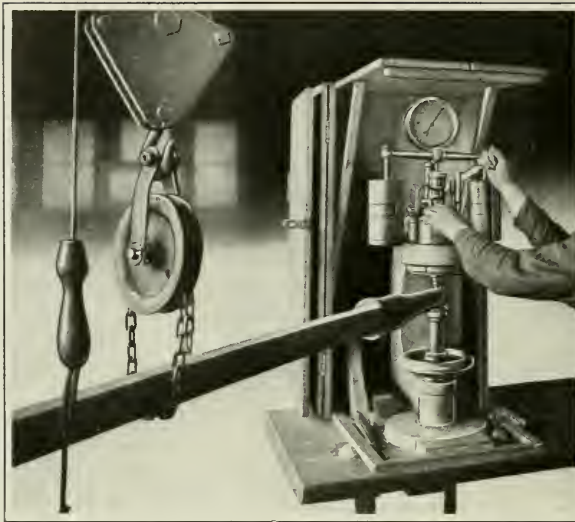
Motor Truck Axle being tested by Brinell Hardness Testing Machine
